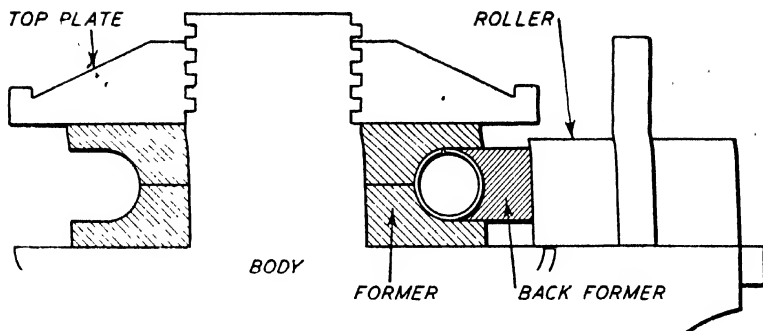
SHAPE OF TOOLS REQUIRED TO BEND LIGHT-GAUGE TUBES
